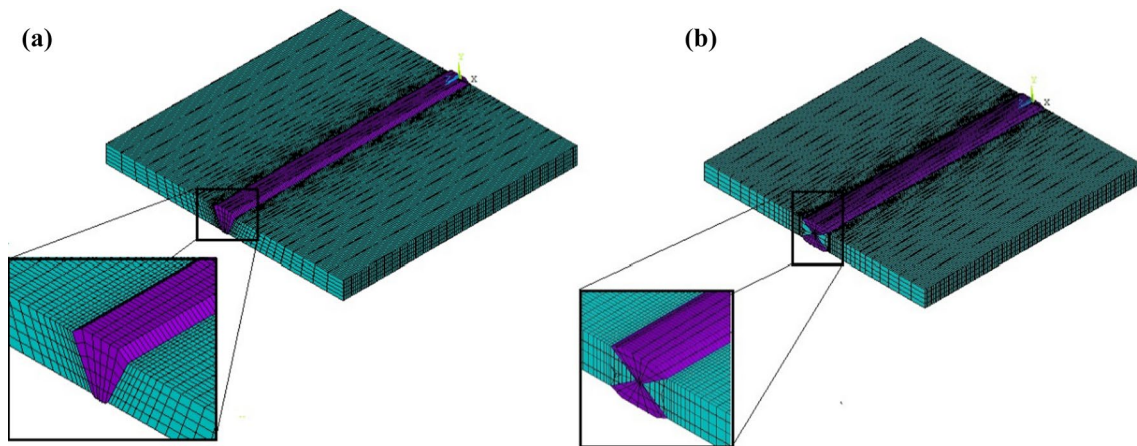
Draft model and meshing of a single-sided single-pass weld joint, b double-sided single-pass weld joint
